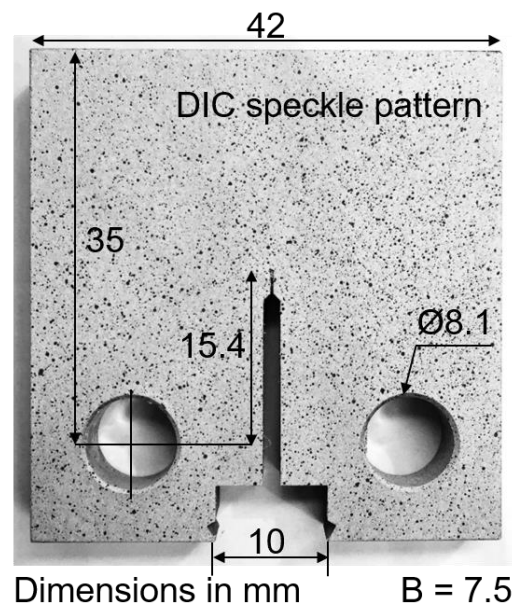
Dimensions and DIC speckle pattern of WAAM IN625 C(T) specimen. B refers to specimen thickness. Machined crack length of 15.4 mm excludes fatigue pre-crack.
